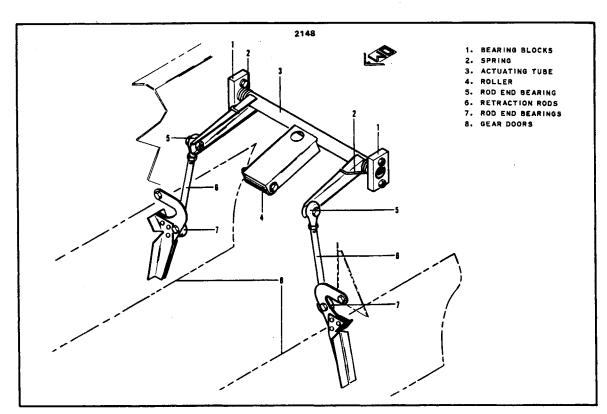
Mechanical Nose Gear Door Mechanism PA-23-250; PA-23-235; and PA-23-250 (six place) Serial Nos. 27-2000 to 27-2504 incl.
